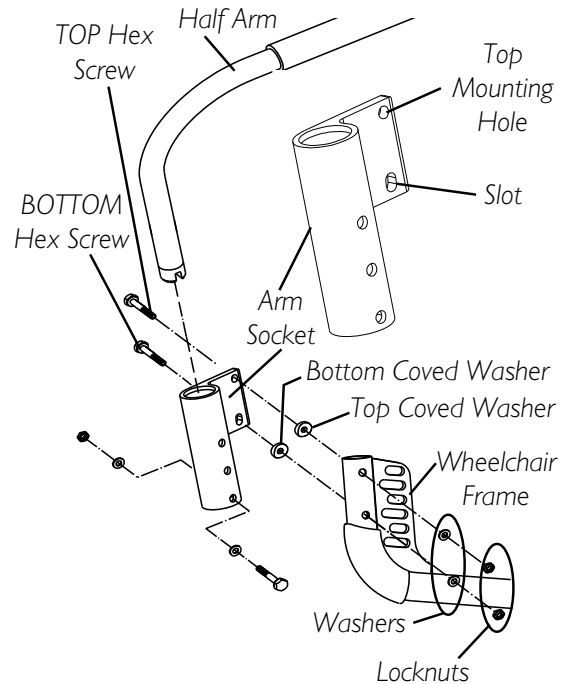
INSTALLING THE HALF ARM SOCKET
